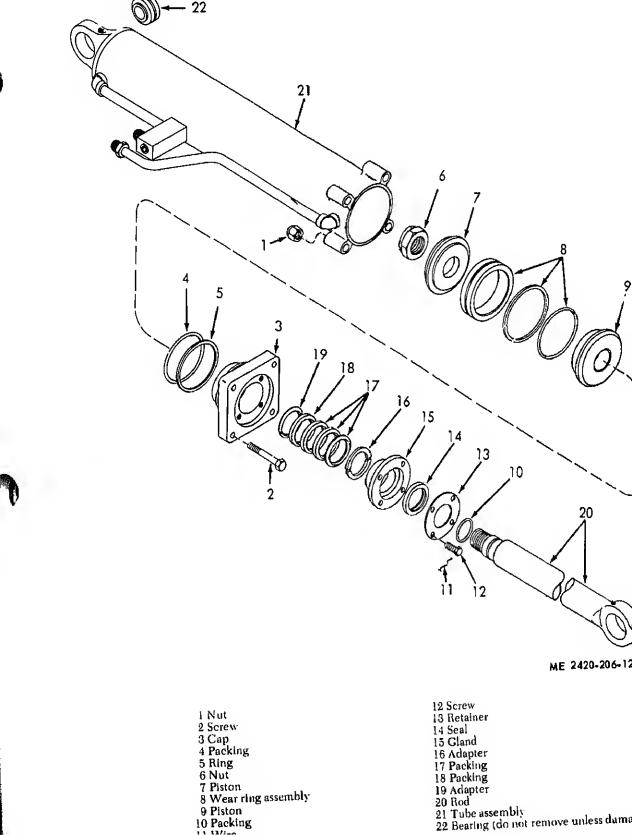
Steering hydraulic cylinder, removal, disassembly, reassembly and installation (sheet 1 of 2).
